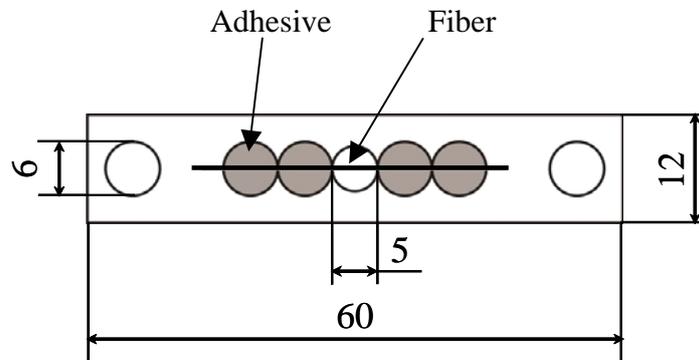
Schematic drawing of a tensile test specimen (All dimensions are in mm.).
